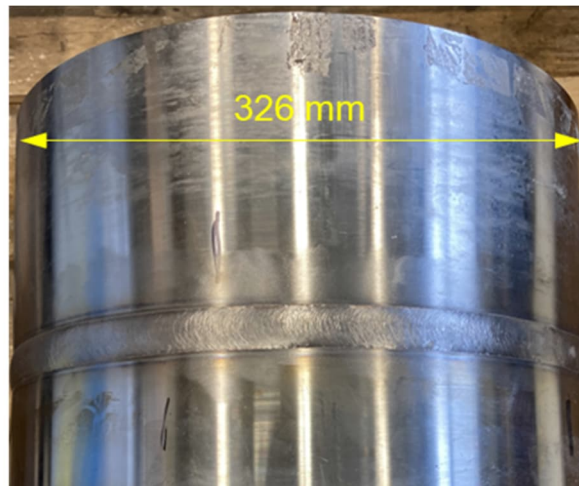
316L pipe welded with NG-GTAW method.
